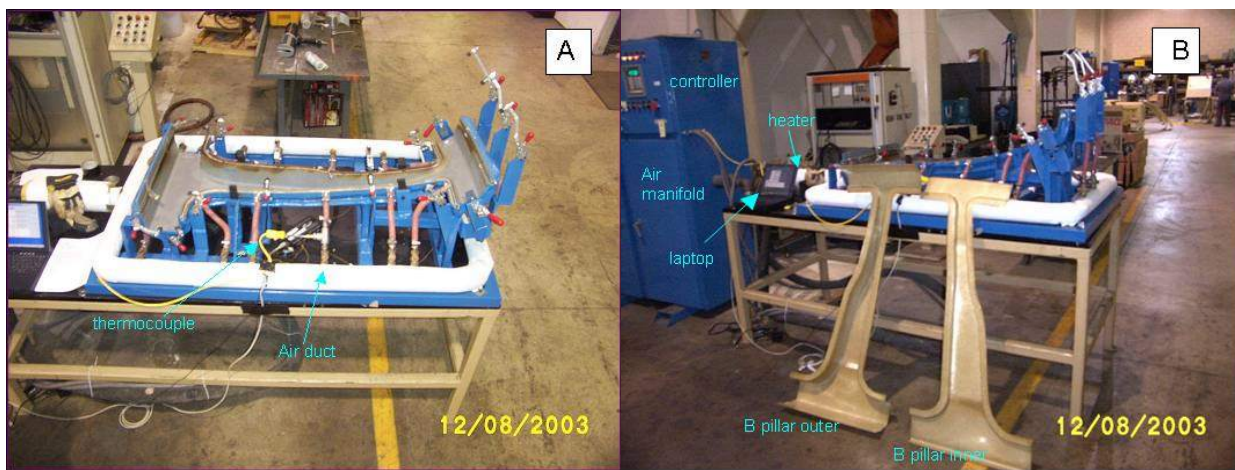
A) B-pillar bond fixture with cavity for outer and hot air duct (white) and B) Bond fixture showing controller and manifold (blue), heater and B-pillar sections: outer (left) and inner (right).
